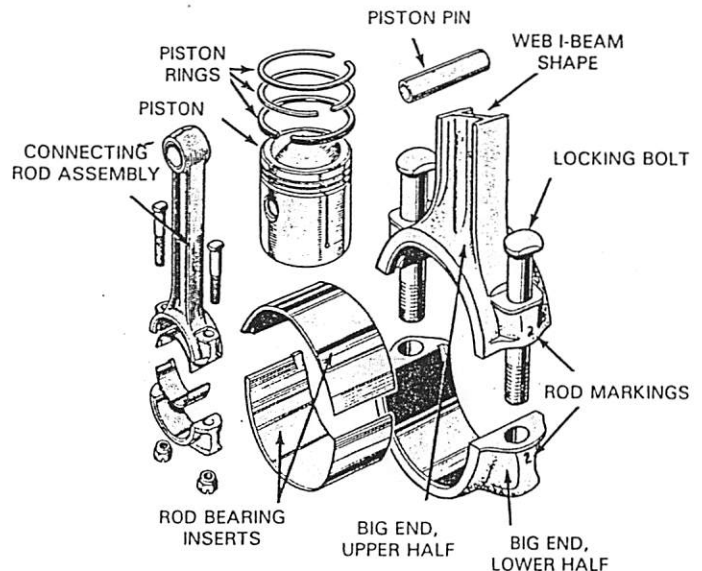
Typical connecting rod; forged steel rod used in conjunction with aluminum piston. (Jaguar)
